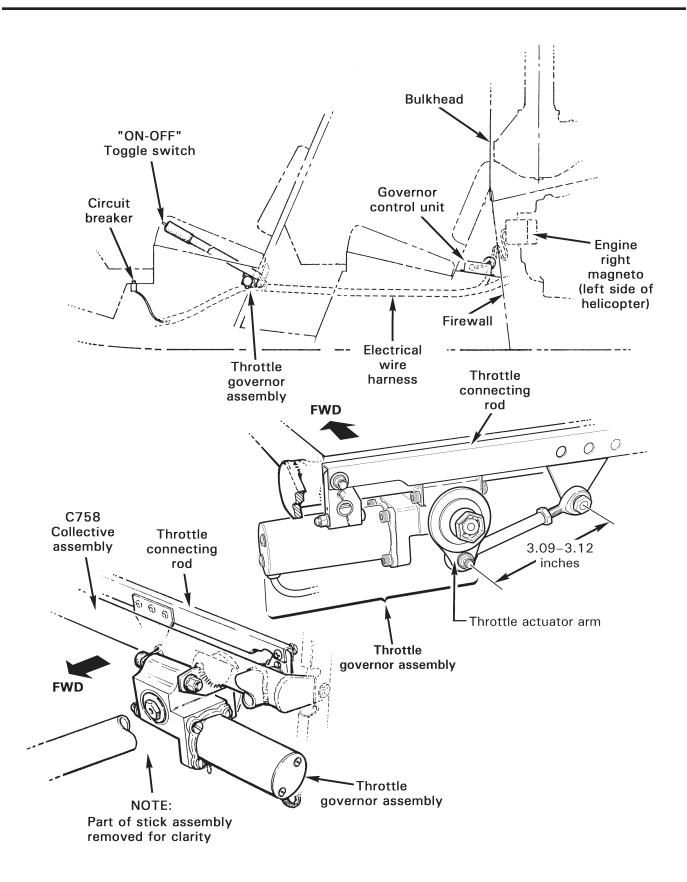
A THROTTLE GOVERNOR INSTALLATION
